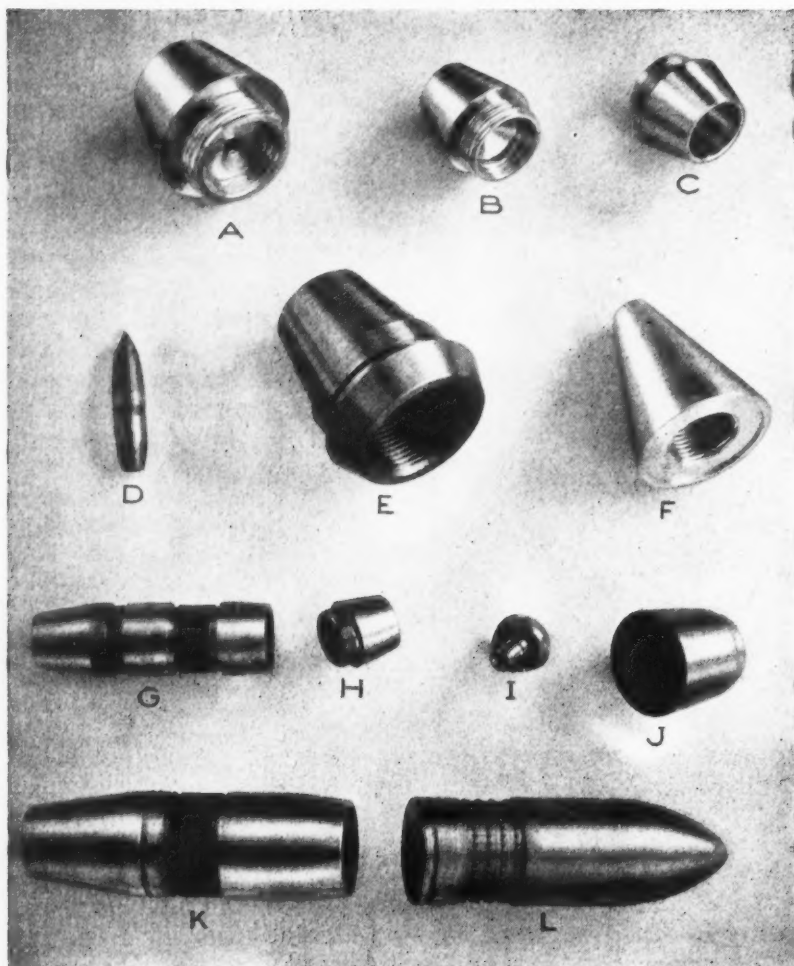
Munitions Parts Made in Great Quantities on Multiple-spindle Automatic Screw Machines
